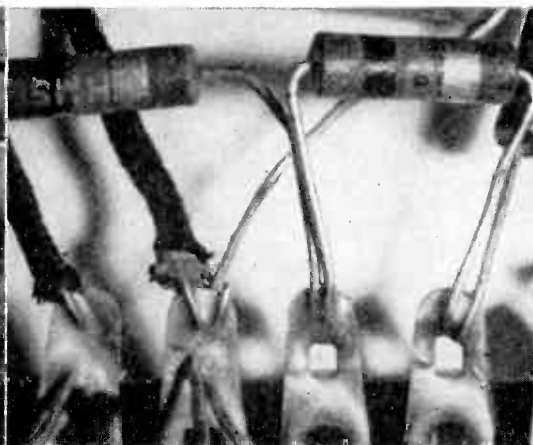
An example of poor soldering. The lumpy, cracked appearance shows too much solder was used and the joints were not heated enough.
